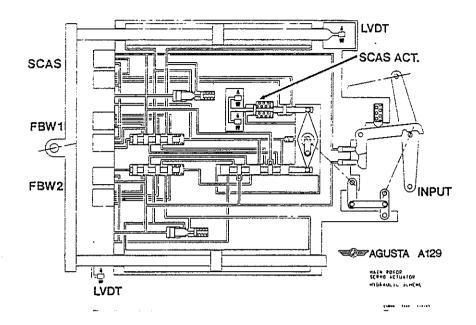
MAIN ROTOR HYDRAULIC SCHEME
